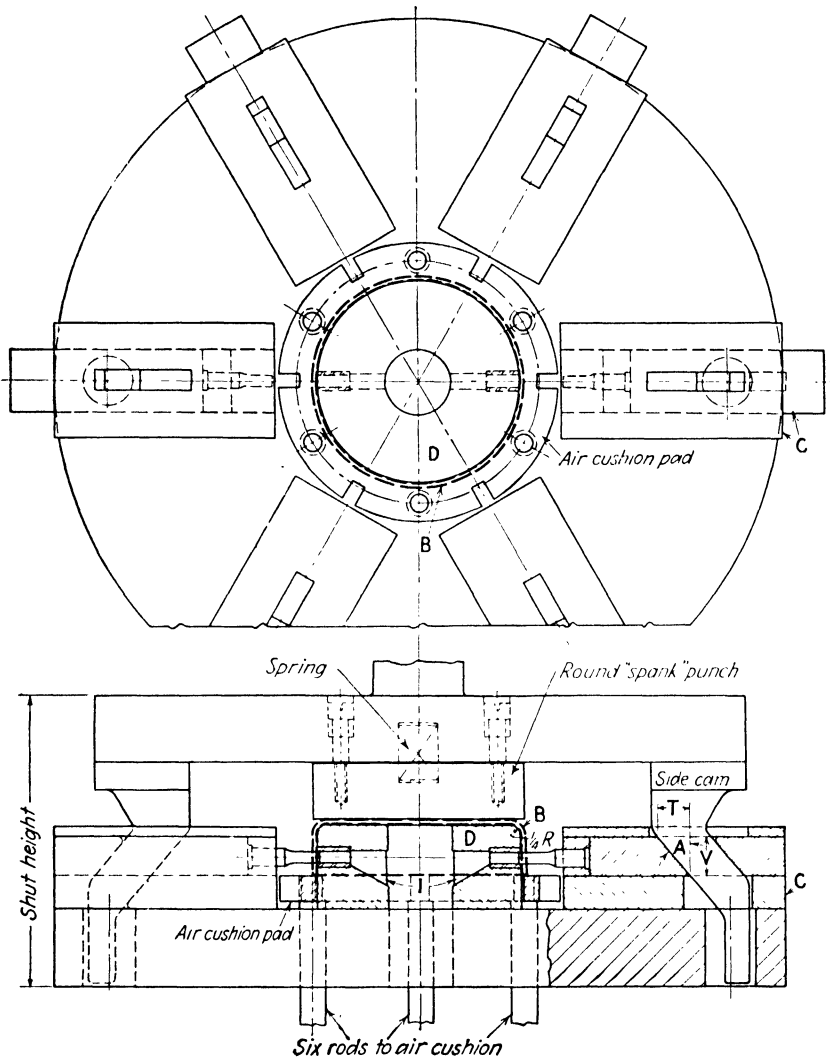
Semiuniversal punching units arranged in a circle for perforating six holes horizontally in a side-cam type of die. The die bushings are "shimmed out" for grinding. No guideposts are required in the die set for this type of press tool.
